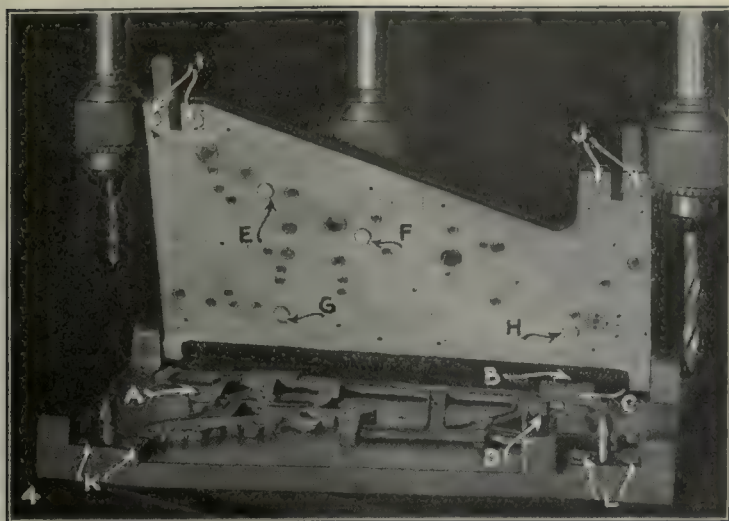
DRILLING THE SIDE HOLES. FIG. 5—MILLING FOR BEARING CAPS
